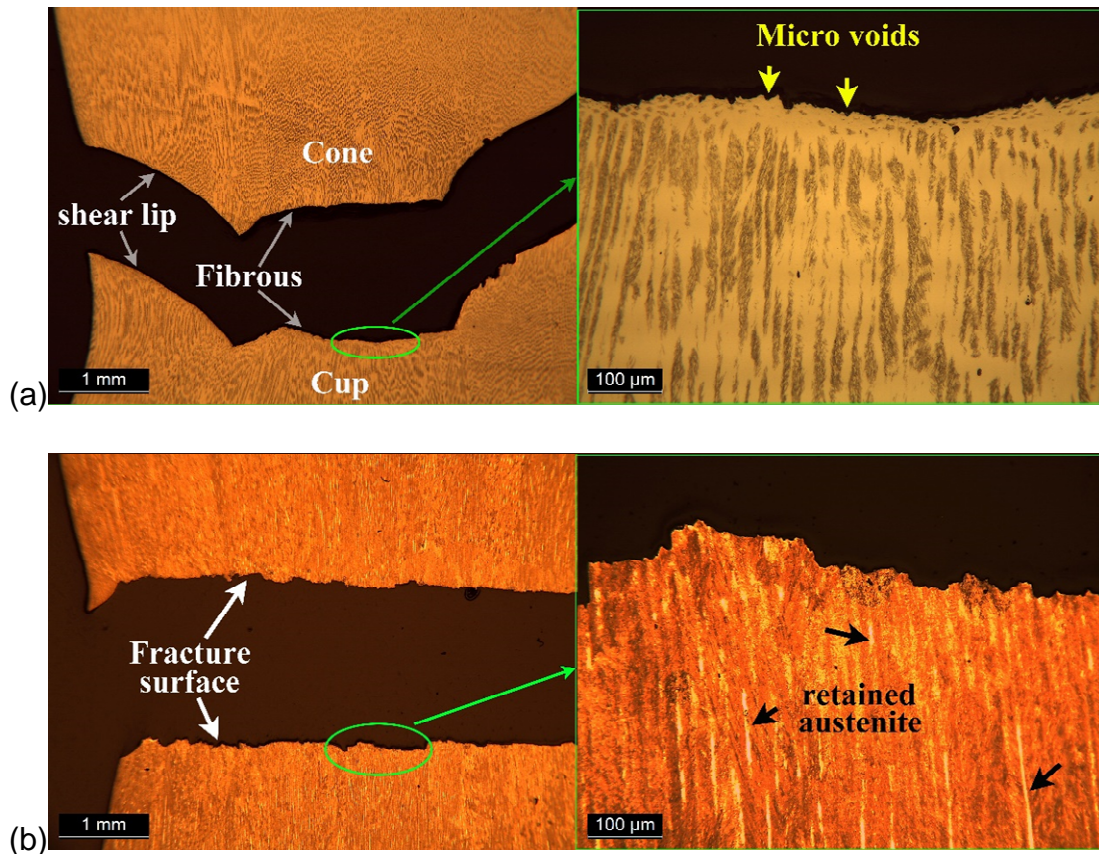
Optical microscopy of the joint fracture surface (longitudinal section) (a) as deposited (b) heat treated.
